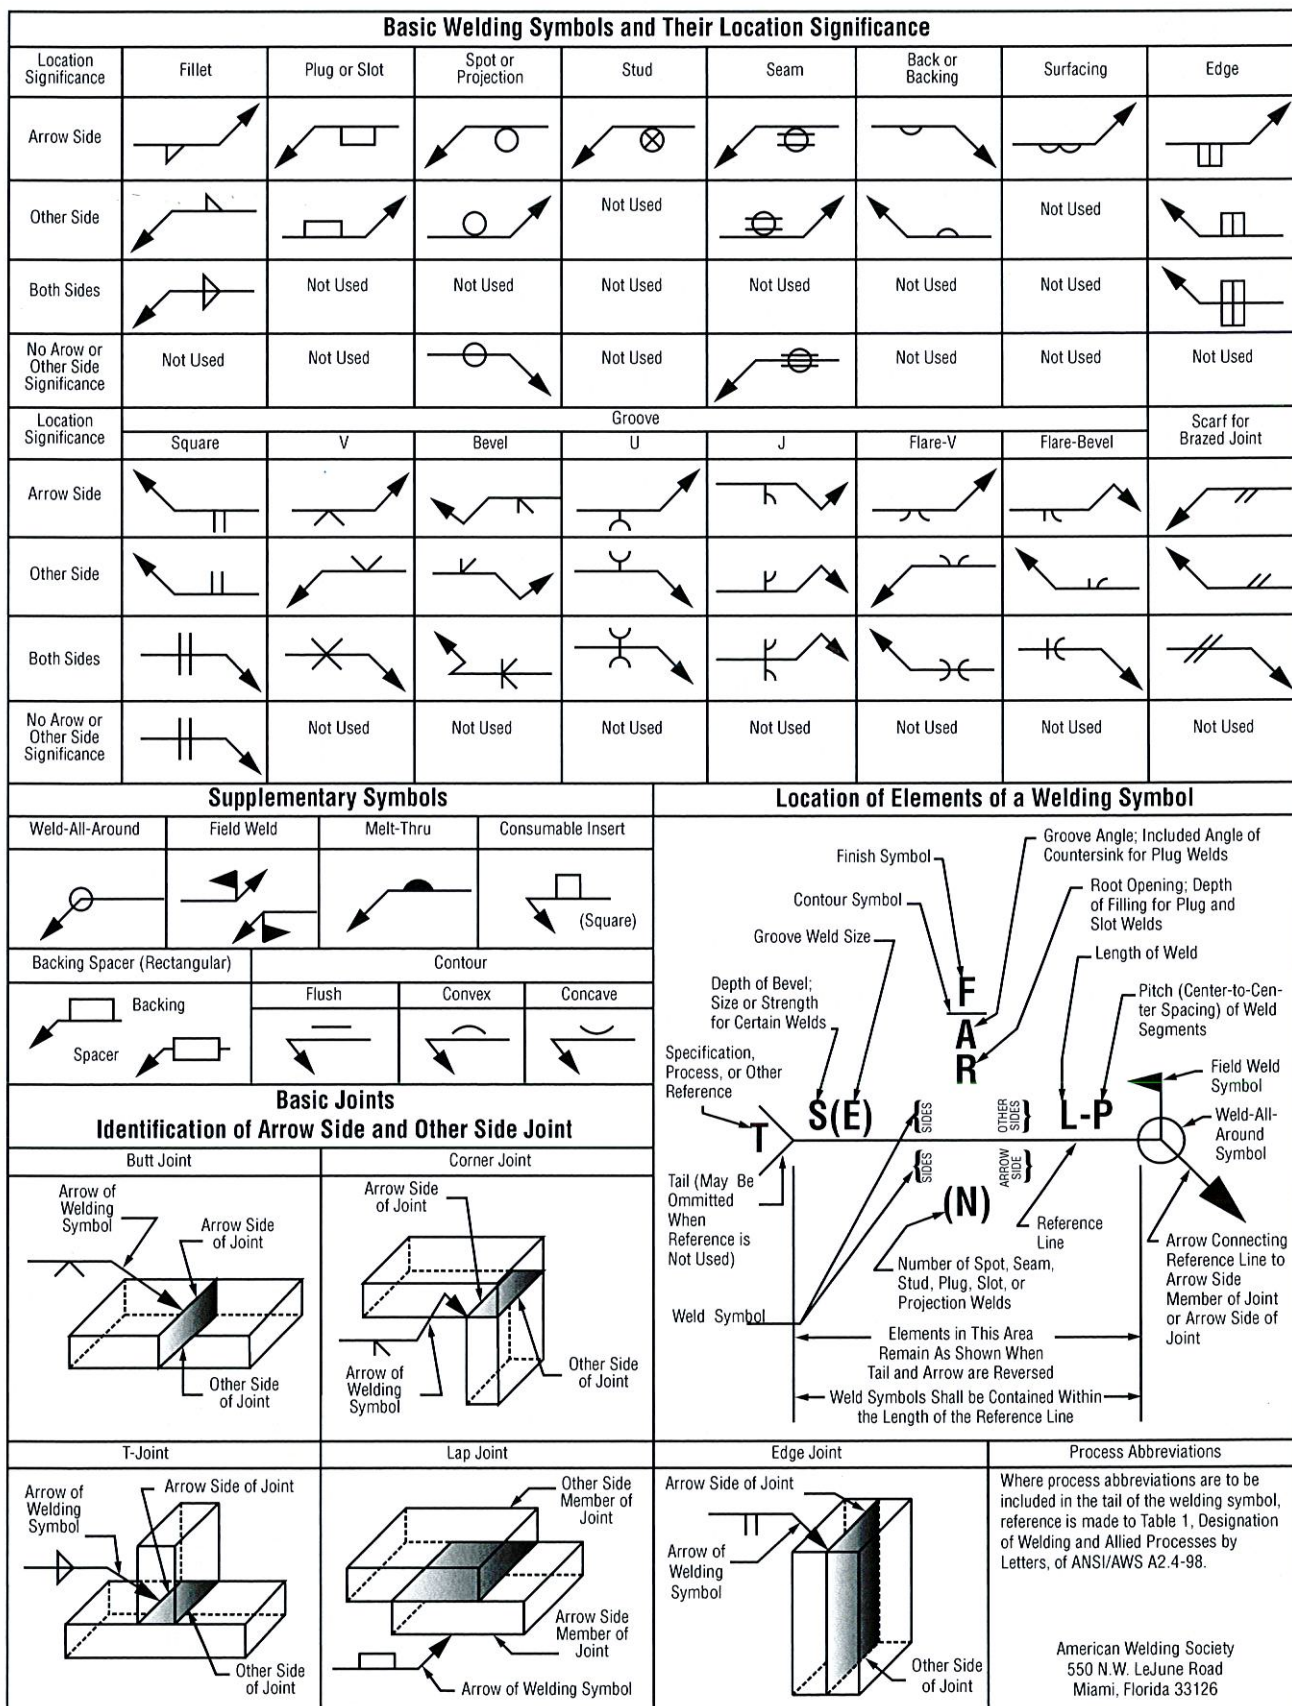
The American Welding Society Welding Symbol Chart
